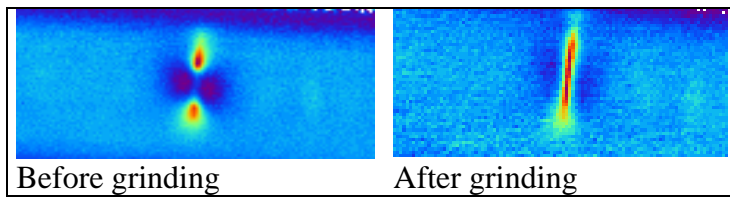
Crack in 4-point bend specimen (specimen No. 1)
